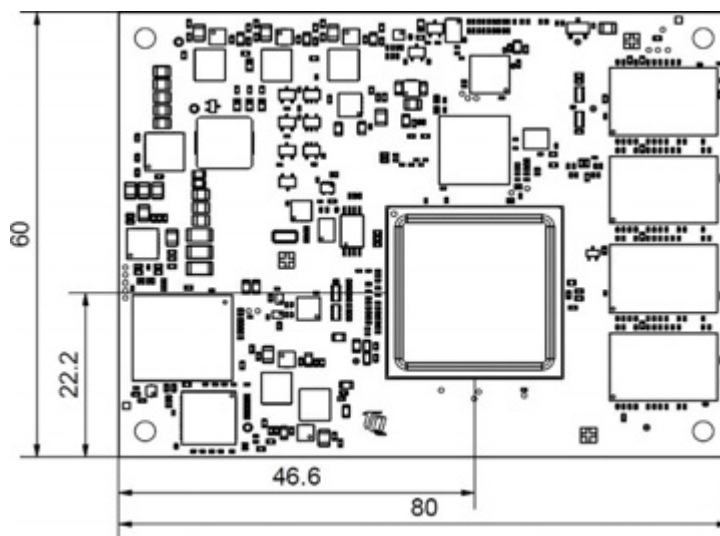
TQMLS1046A / TQMLS1088A dimensions, top view
